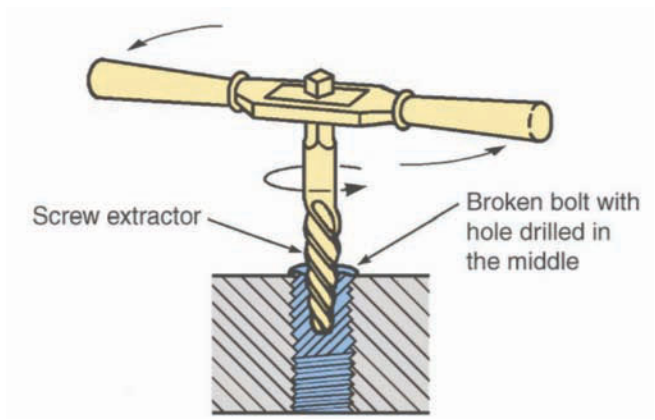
A screw extractor is a handy tool to assist in the removal of broken fasteners.
